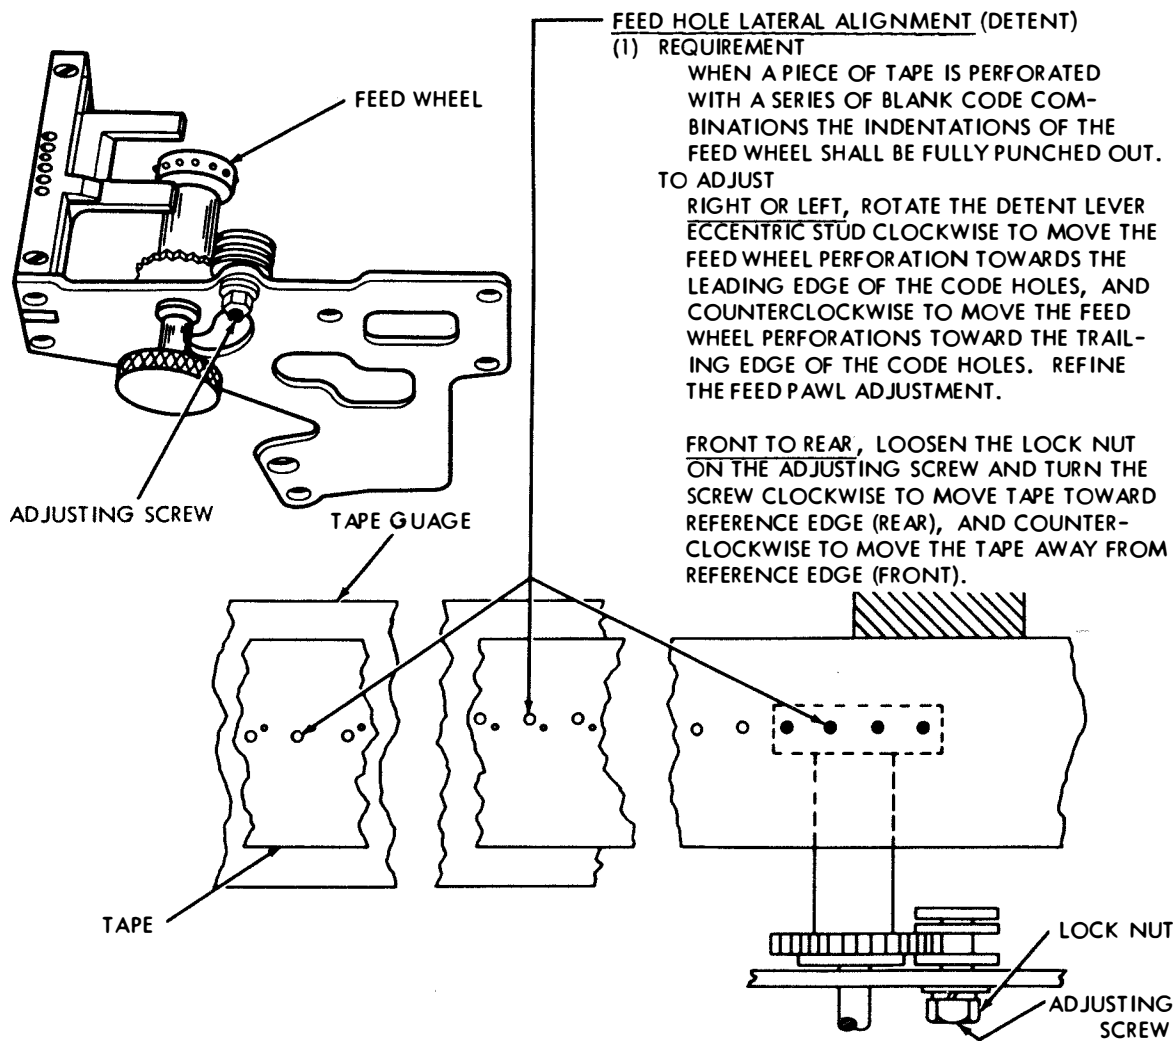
Perforator Mechanism for Fully Perforated Tape (TT-253A/UG)
